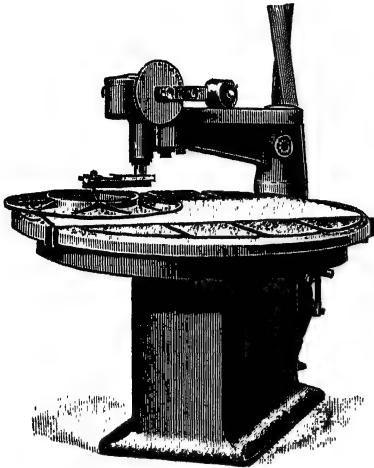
Smoother or Polishing Machine for Blocks 1.5 metres diameter.
